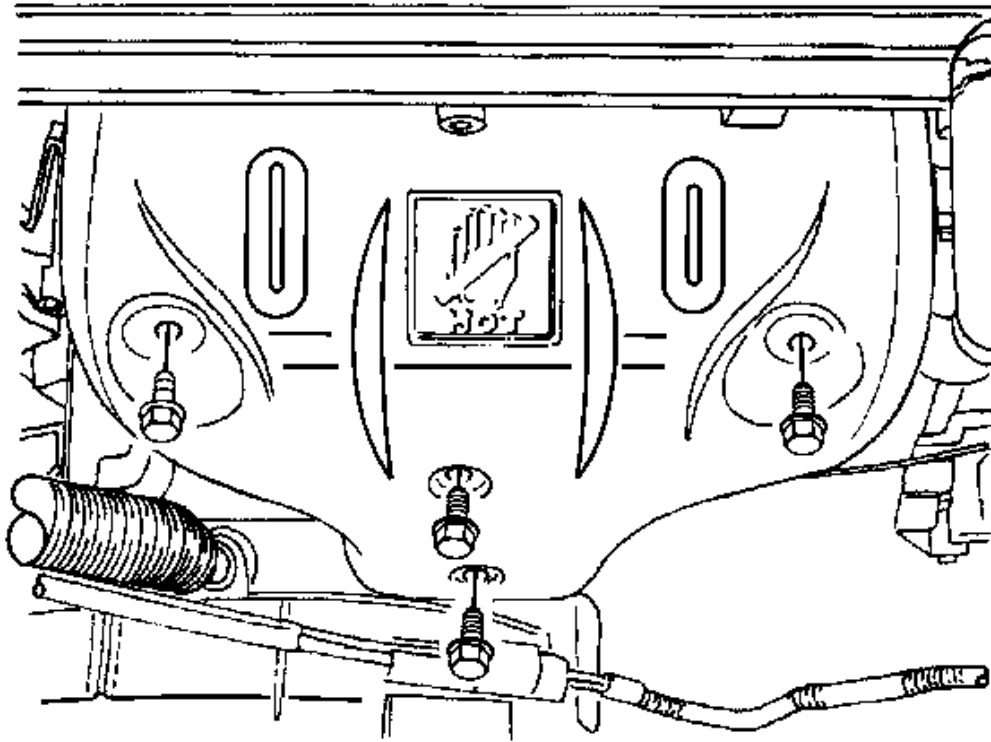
View Of Exhaust Manifold Heat Shield And Bolts
